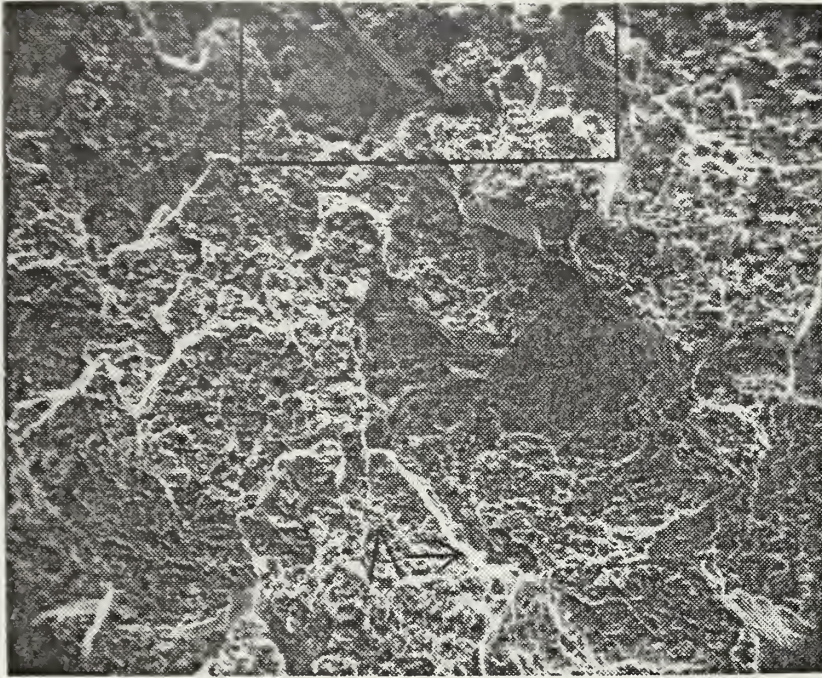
Fractograph of the fibrous zone of Fig. 100, showing tear ridges (A) and cleavage facets with some equiaxed dimples. Fracture surface shows brittle and ductile fracture. X500.
